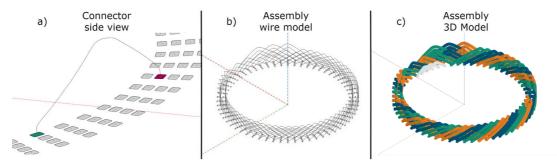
Hairpin-winding modelling: a) Single connector, b) assembly wire model of exemplary design, c) assembly 3D model of exemplary design, coloured to show the phase of the conductor
